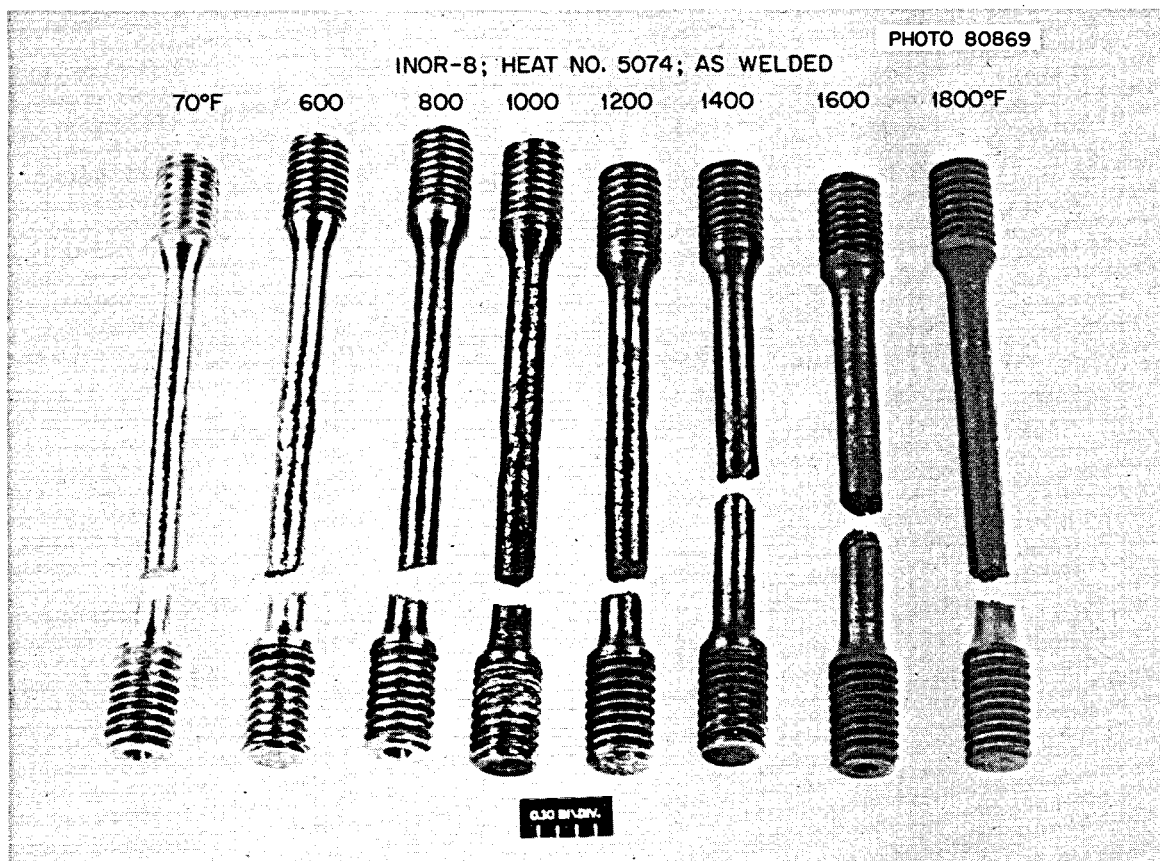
Tensile tests in INOR-8 heat 5074 (as welded) showing location of fracture.
